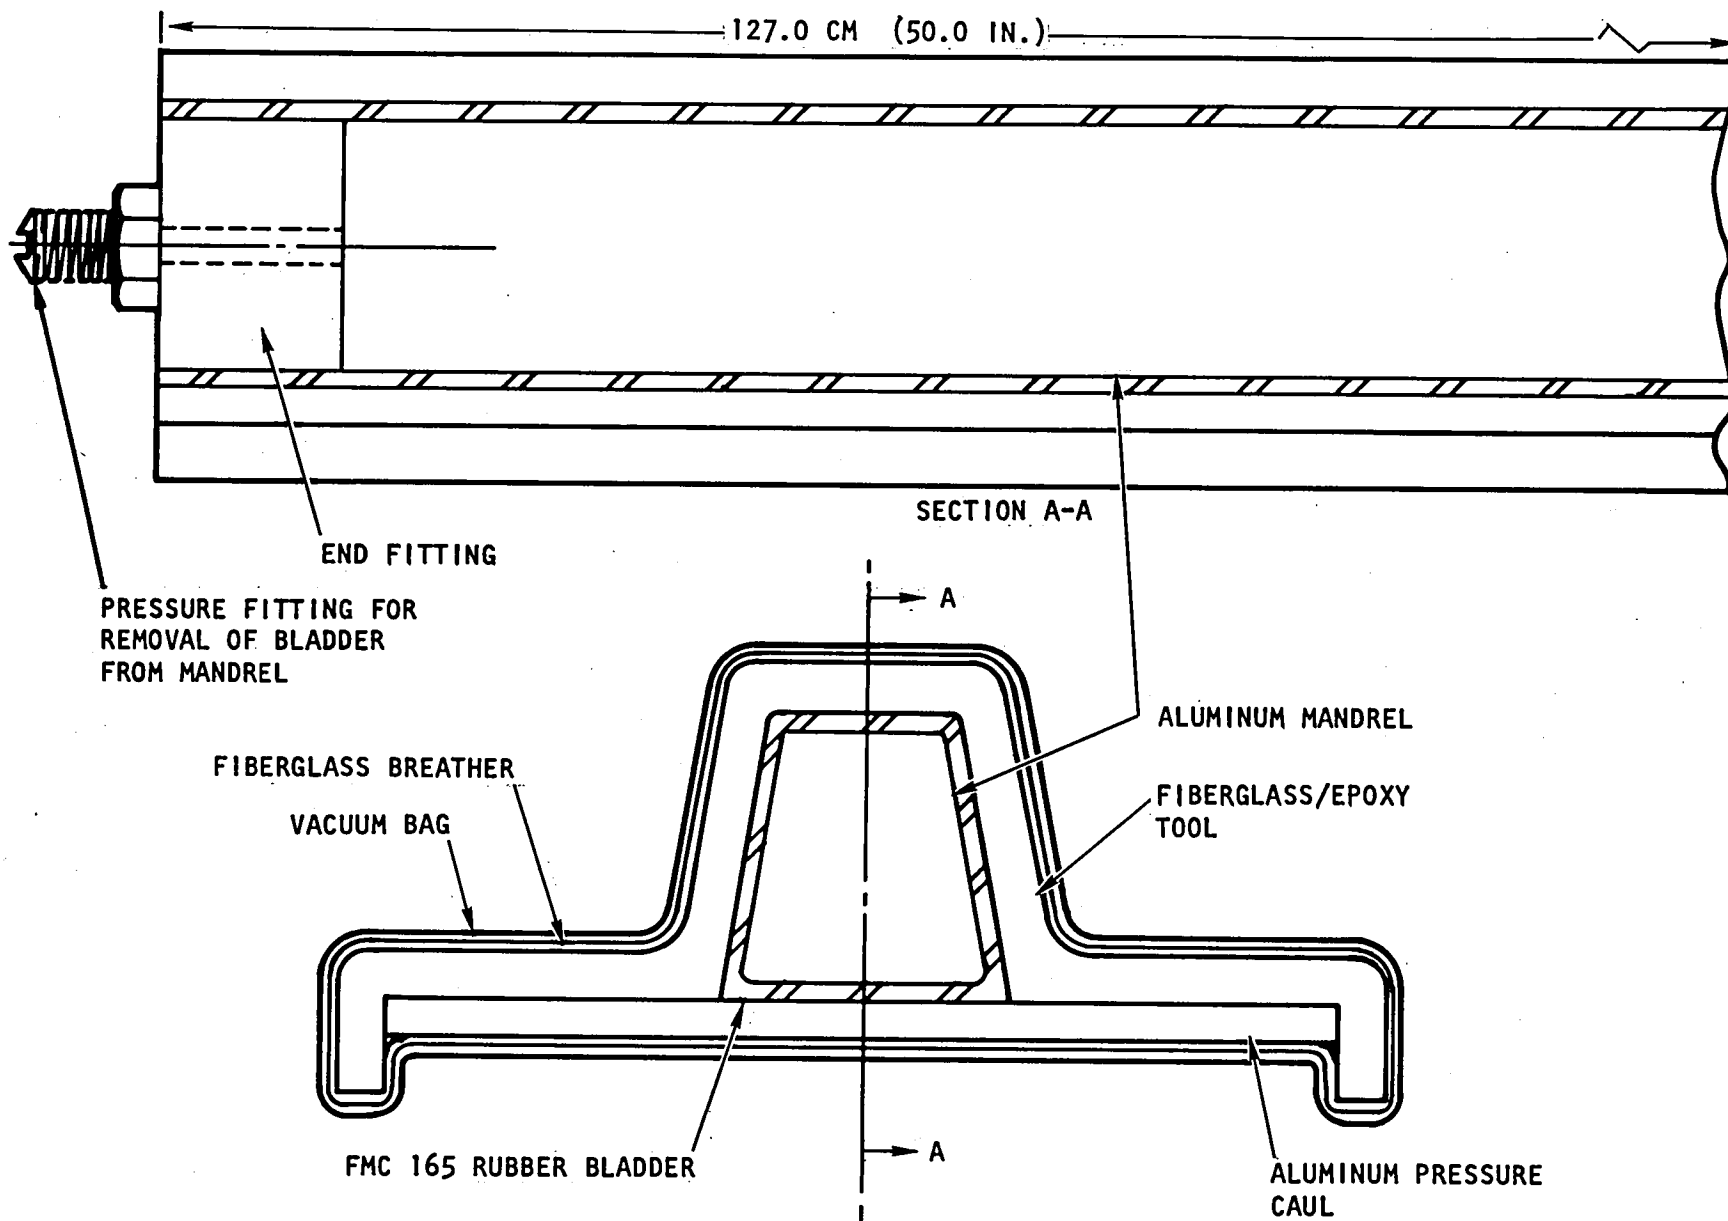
Cross-Section - FMC165 Rubber Bladder Molding Concept
